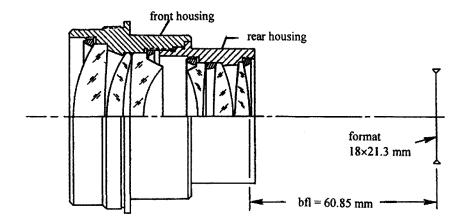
A 90-mm, f/2 motion picture projection lens assembly. (Courtesy of Schneider Optics, Inc., Hauppauge, NY.)
